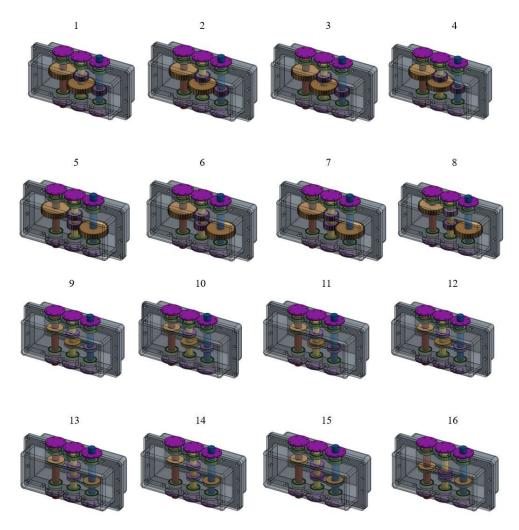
Experiment 2 Gearbox Assemblies for Design Review
